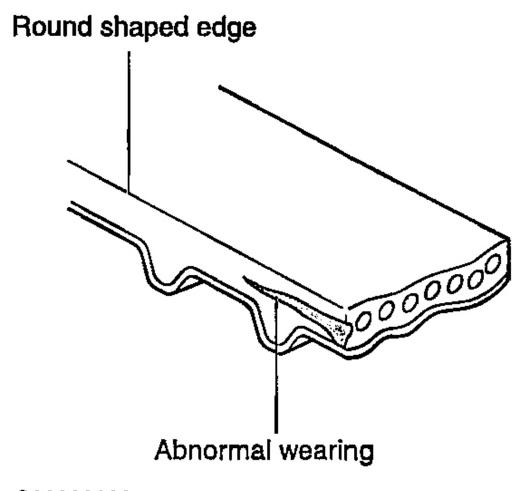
Testing Timing Belt For Cracks Courtesy of KIA MOTORS AMERICA, INC.
